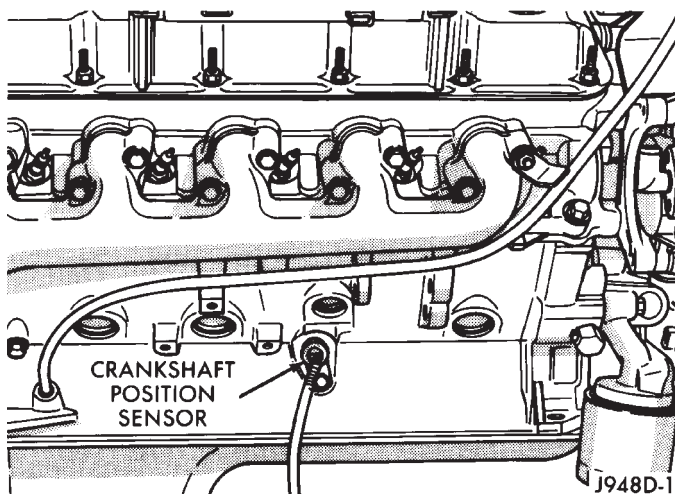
Crankshaft Position Sensor—3.9L/5.2L/5.9L Engines—Typical
